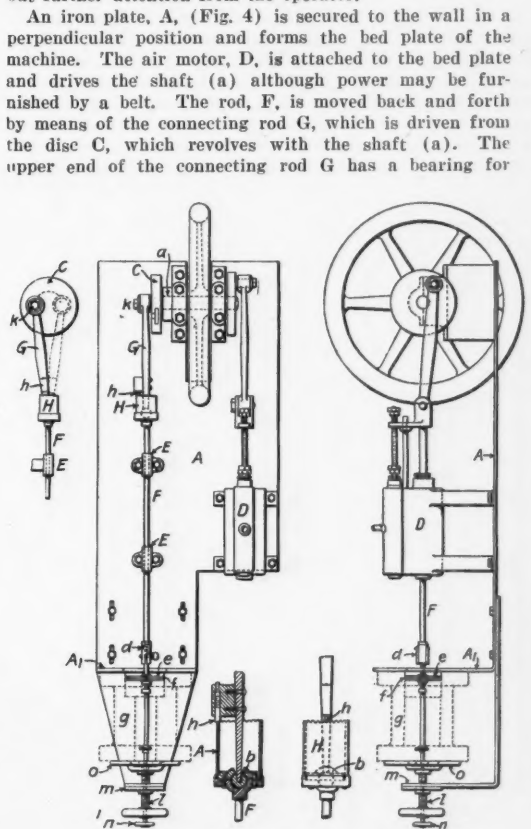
Machine for Grinding Packing Rings in Triple Valves—Middletown Shops.
